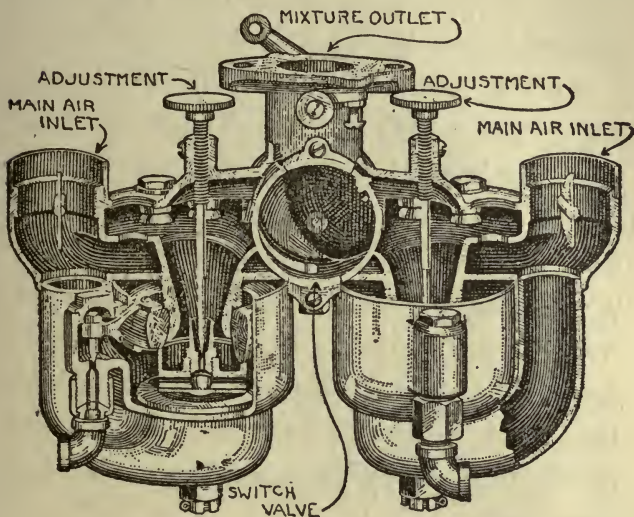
“KINGSTON” CARBURETOR, DUAL MODEL
